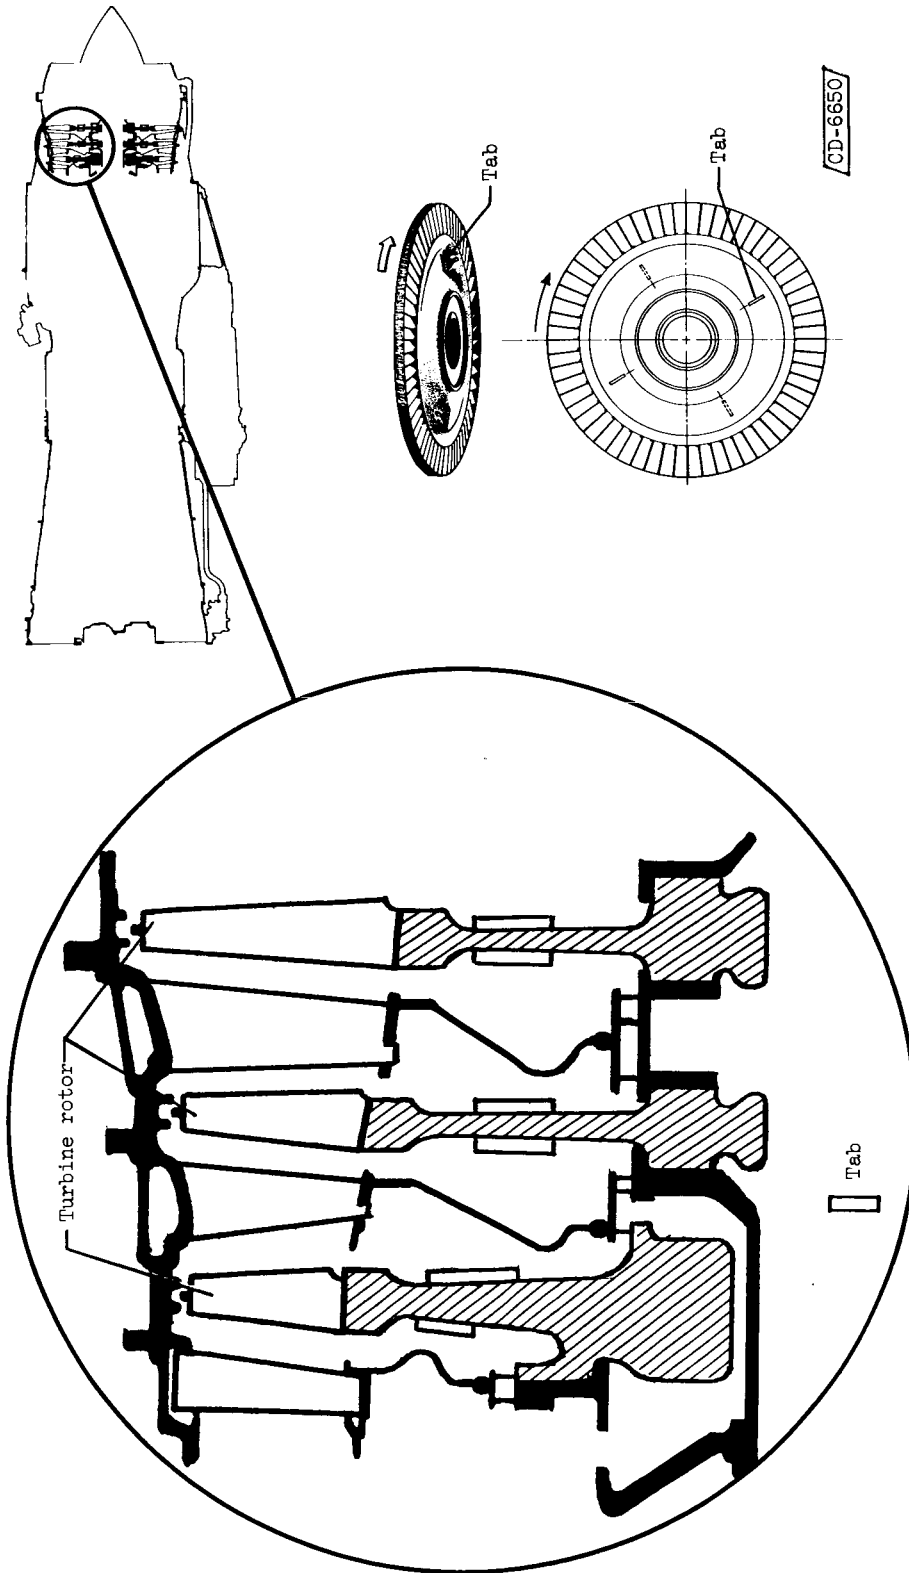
Location of tabs installed on front and rear surfaces of each turbine rotor.
